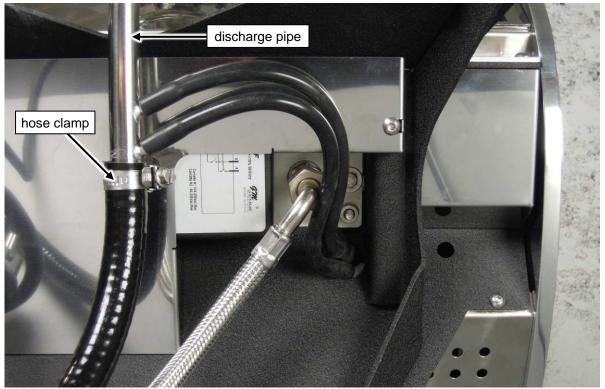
discharge hose is clamped to discharge pipe and water supply is pushed into the machine.
